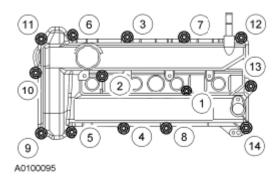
Identifying Valve Cover Bolt Tighten Sequence Courtesy of FORD MOTOR CO.
